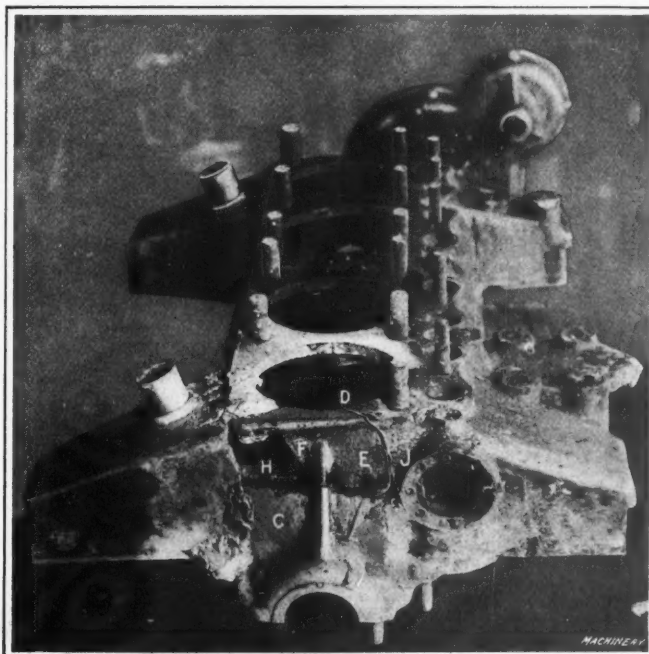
End Bearing partly welded in and Pieces set ready for Welding
